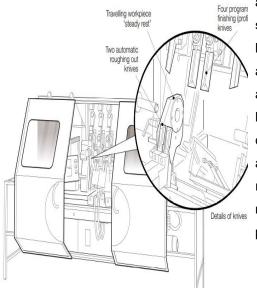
Fully hydraulic automatic copy lathe with interlocked enclosure
